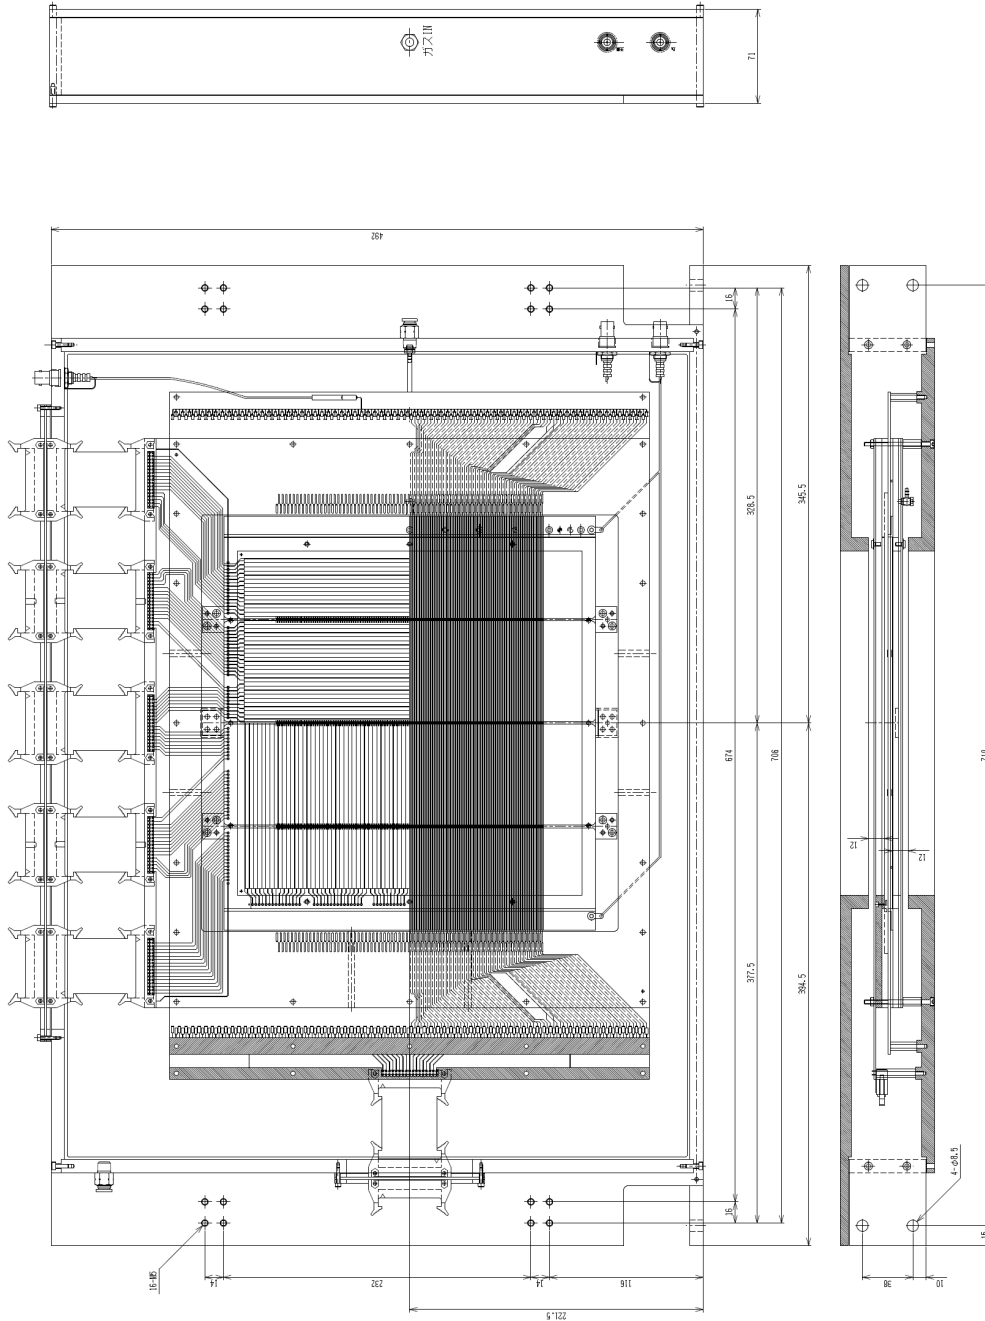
Drawing of the 713-type MWPC used for wire chamber 2 and 3.
